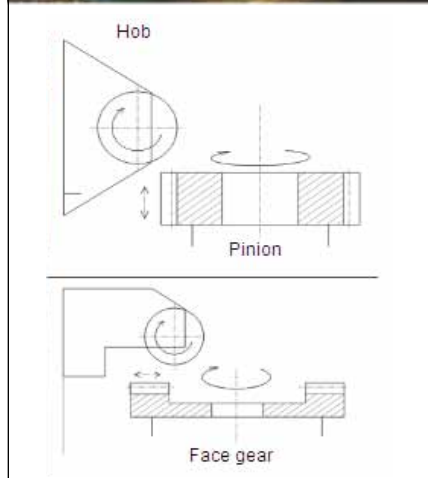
Manufacturing of Cylkro face gears by a six-axis CNC spur gear hobbing machine.
